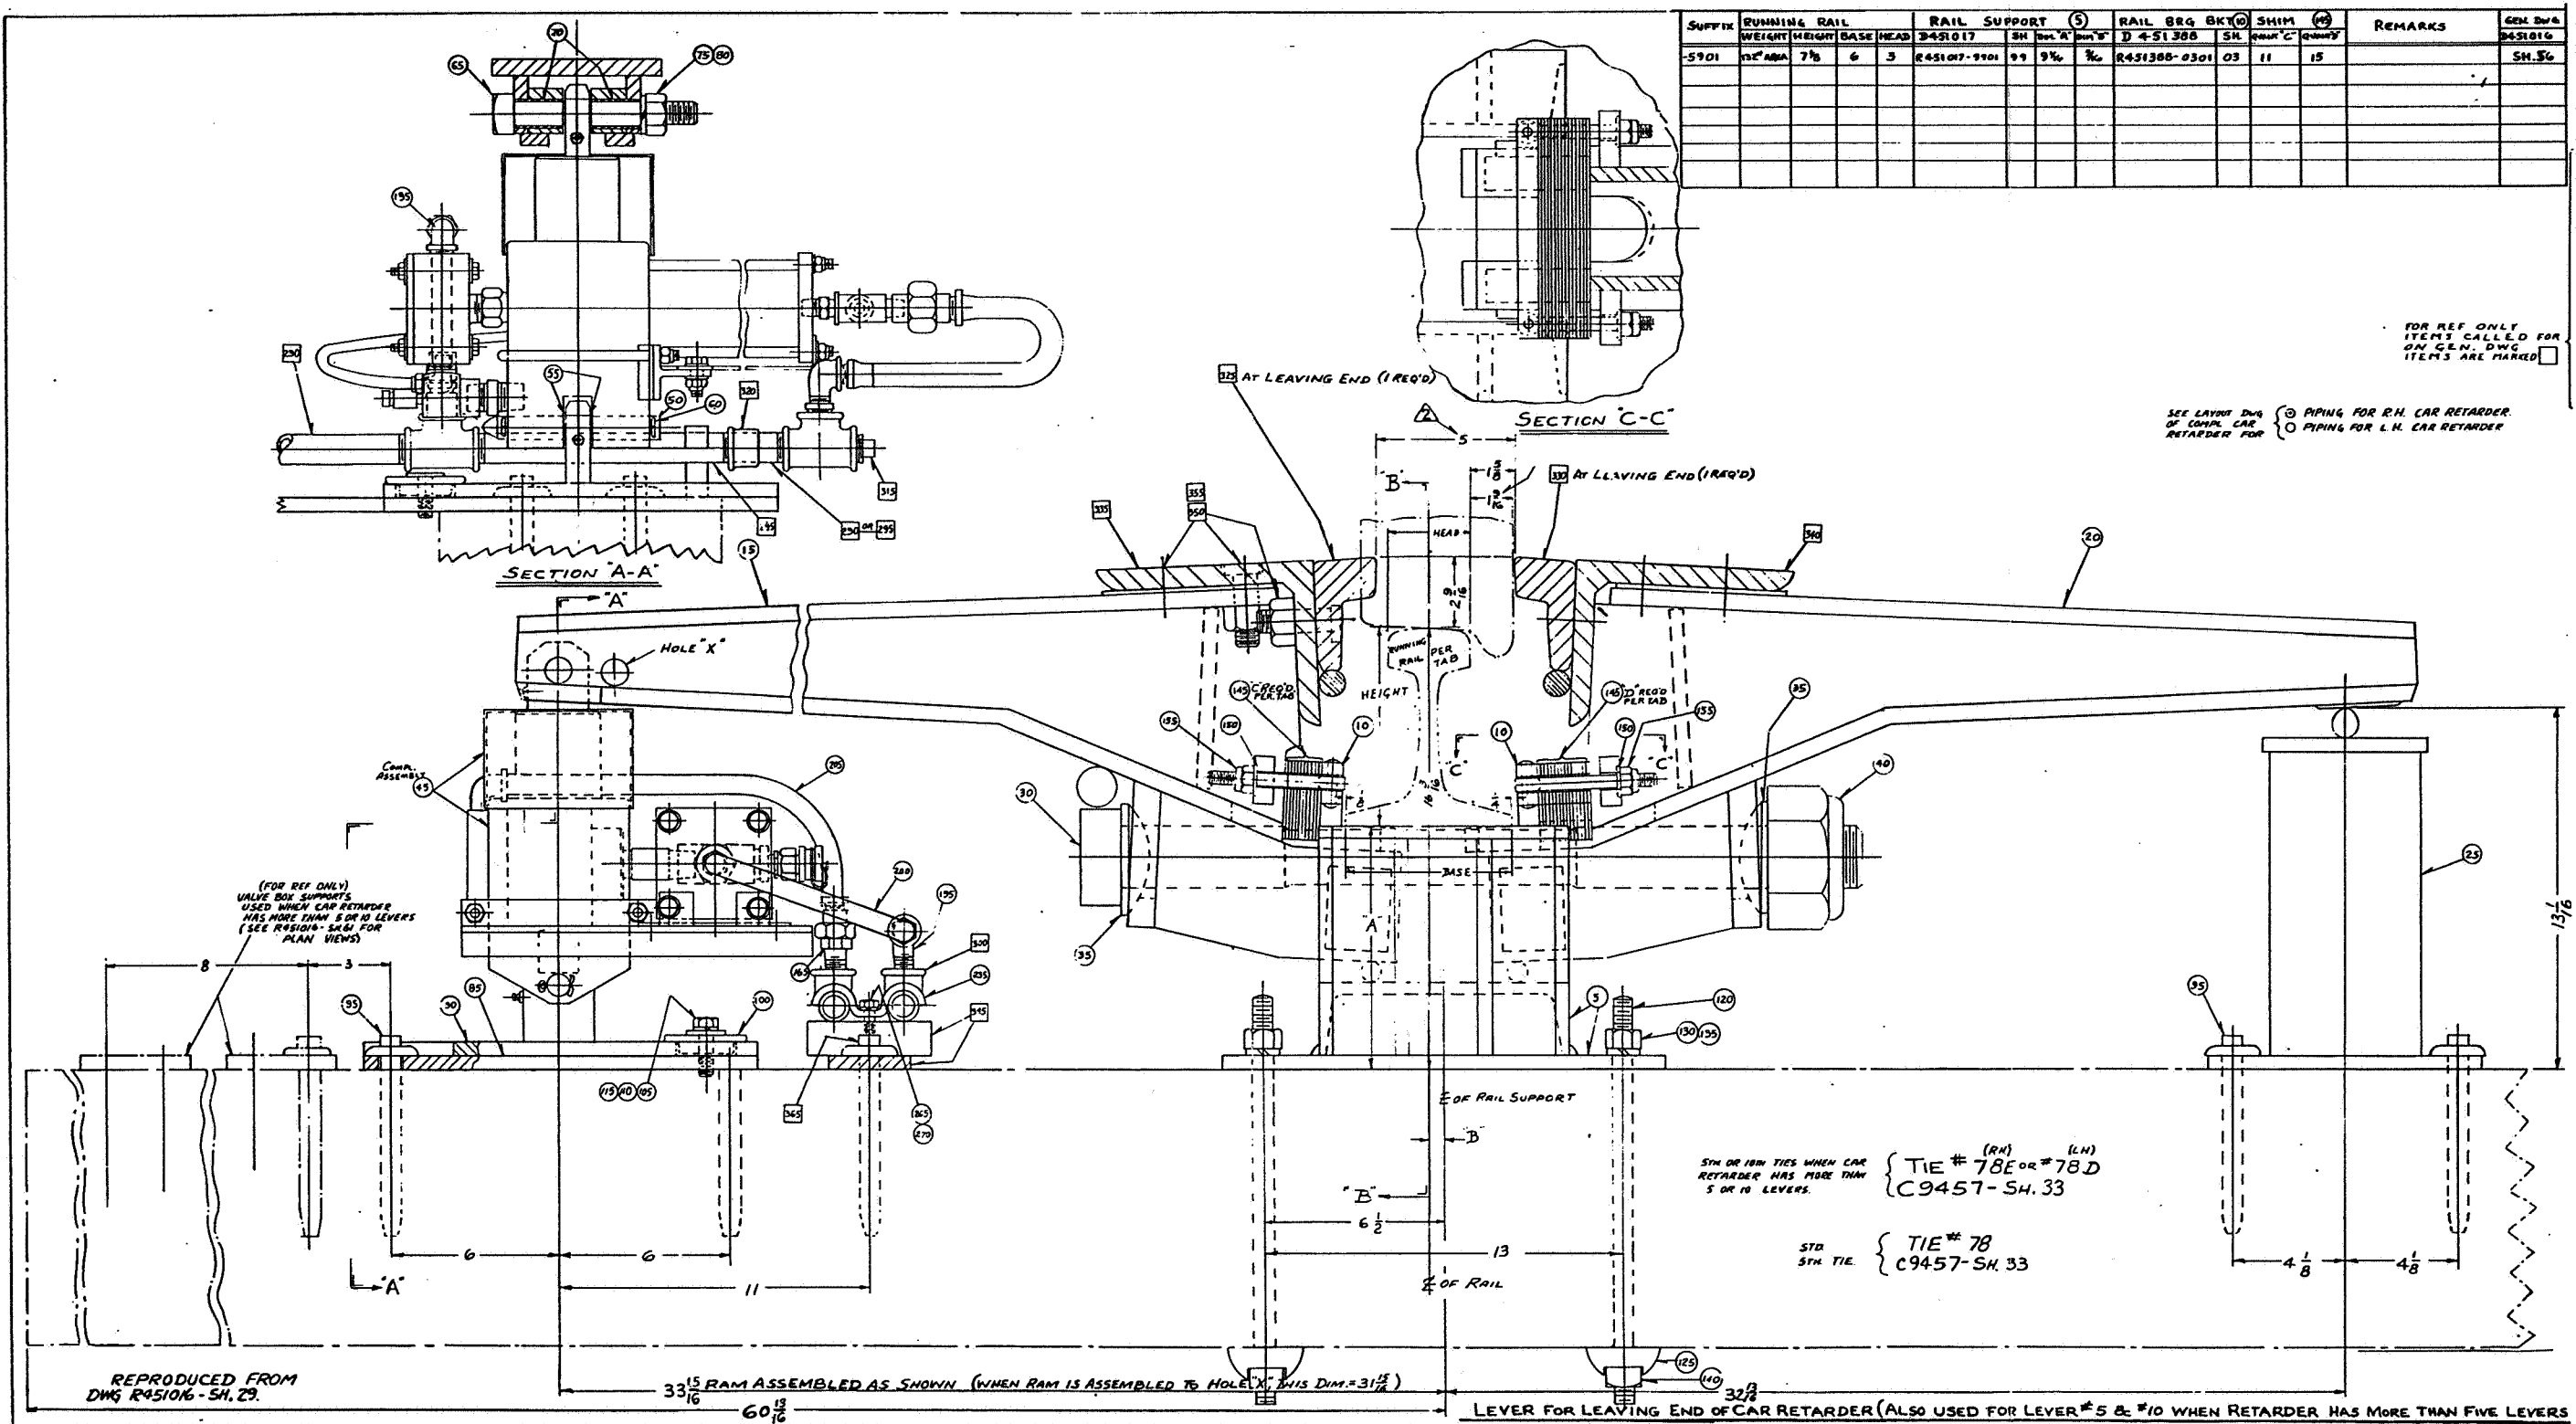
LEAVING END LEVER ASSEMBLY, LOCATORS
